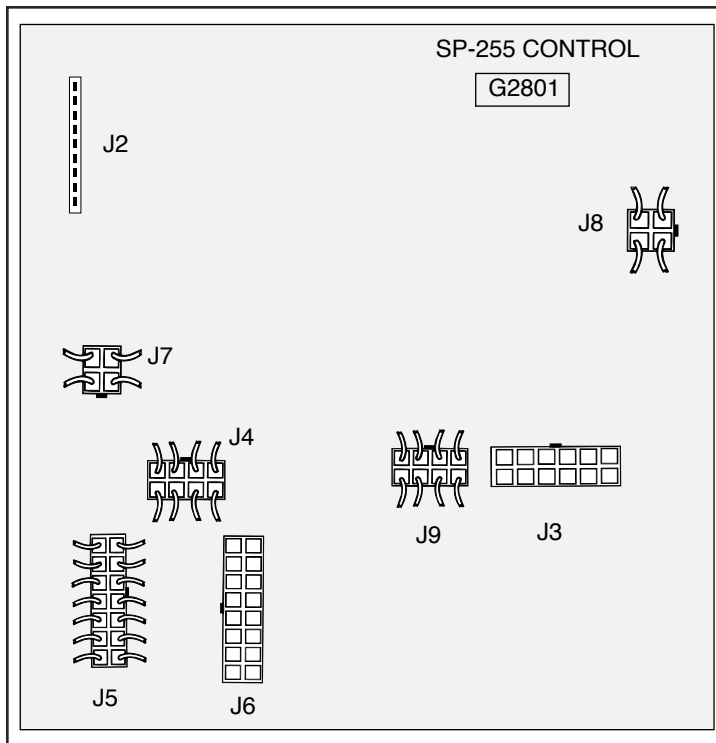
Remove Plugs J3 and J6 to Perform Static SCR Rectifier Assembly Test.
